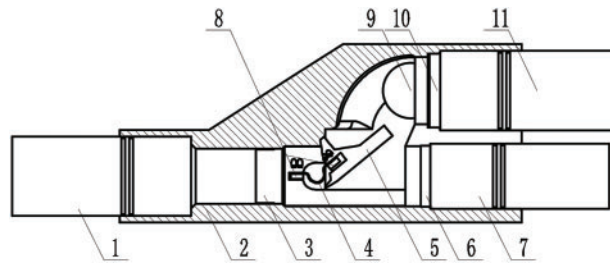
Internal structure diagram of automatic steering tool. 1—3 in 1/4 N.U. tubing; 2—steering tool body; 3—retaining tube; 4—irregular piece spring; 5—fork; 6—ball valve seat 1; 7—2 in 7/8 tubing; 8—stop block; 9—ball valve; 10—ball valve seat 2; 11—3 in 1/4 tubing
